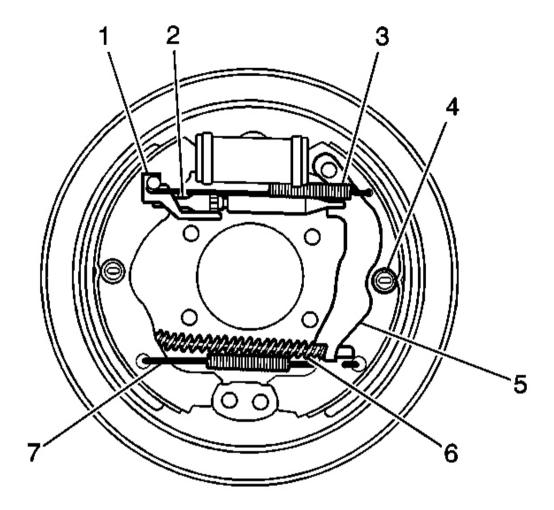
View Of Brake Components Courtesy of GENERAL MOTORS CORP.
